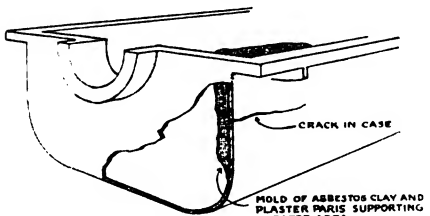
A BREAK CAN BE BACKED UP WITH A MOLD
